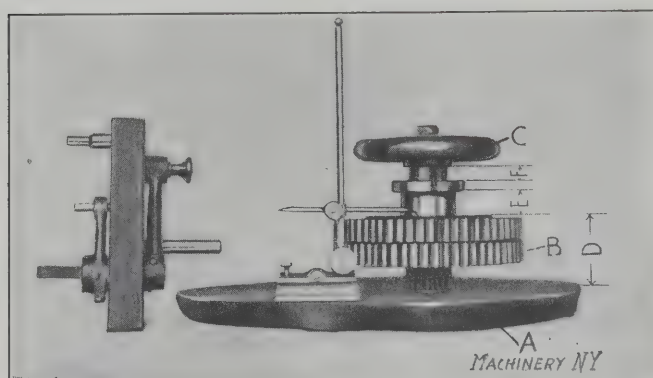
Special Devices used in Assembling the Lathe Apron shown in Fig. 3
